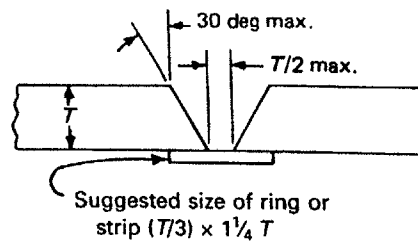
Test Coupon Butt Joint Dimensions [ASME, 2007]
